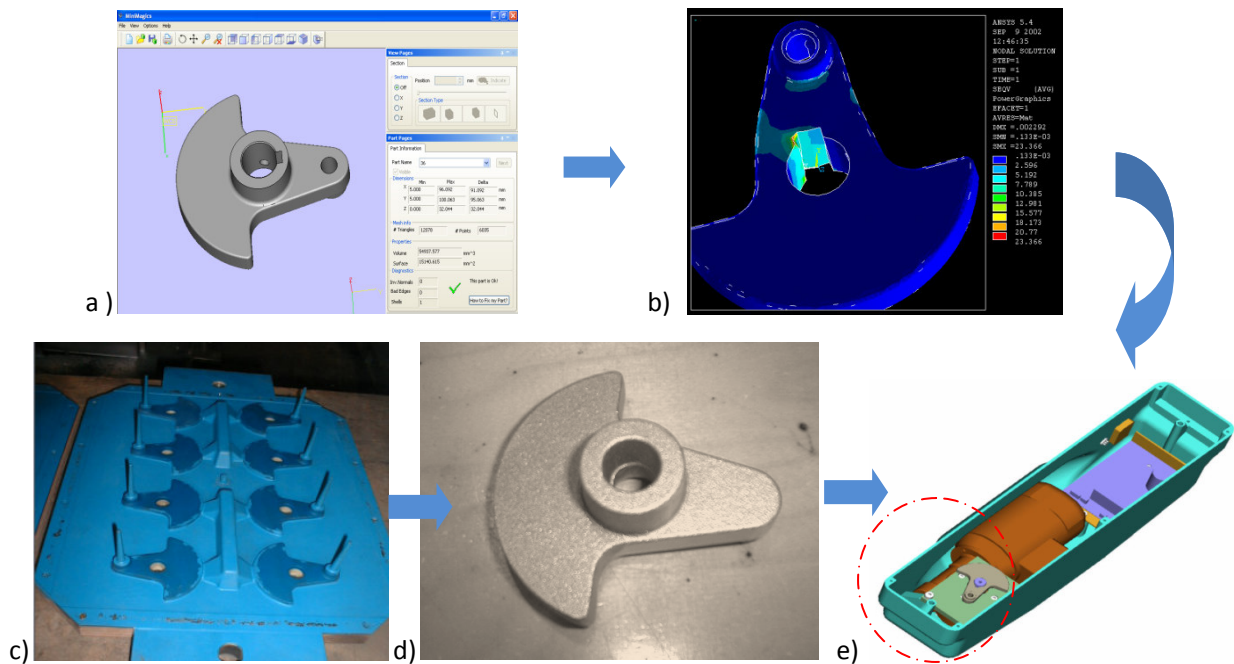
6 Fabrication process for the Al-6063 connecting rod and its final assembly. a) CAD design, b) FEA analysis c) Metal casting process with multiple cavities d) Part finishing e) Assembly (courtesy of CDEI-UPC)
